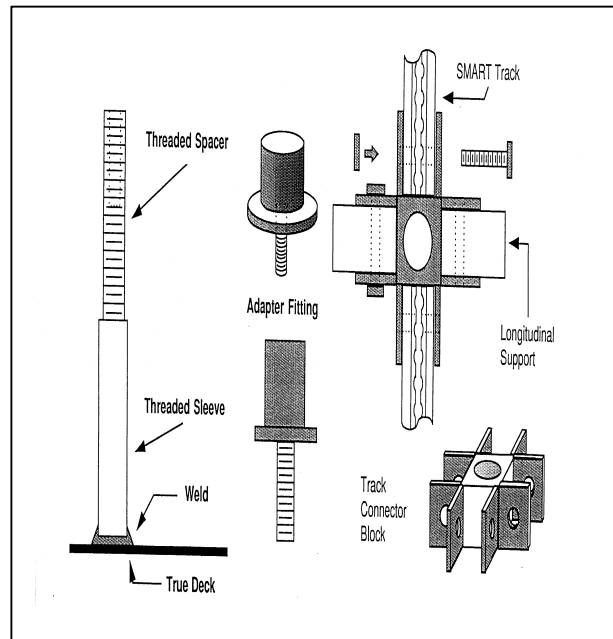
Typical Equipment Foundation With Track Fittings and Foundation Adapter
